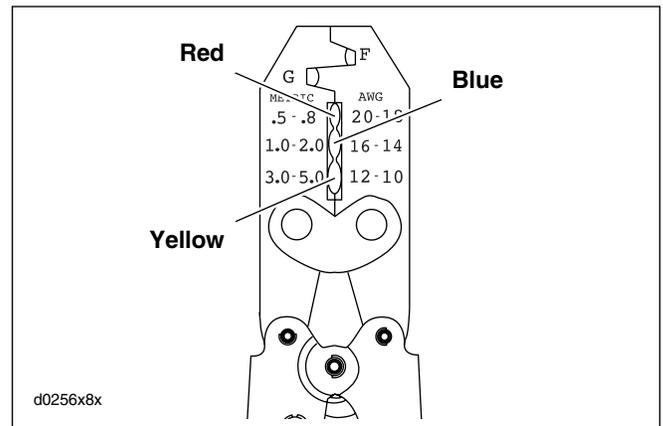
Packard Crimp Tool (Part No. HD-38125-8)
